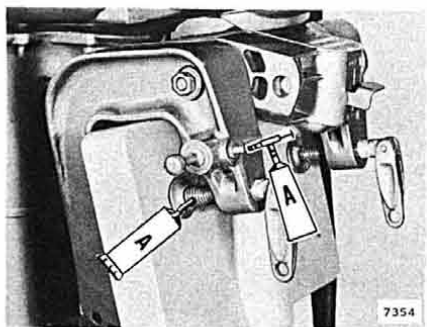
Clamp Screws, Stern Bracket and Tilt Lock
